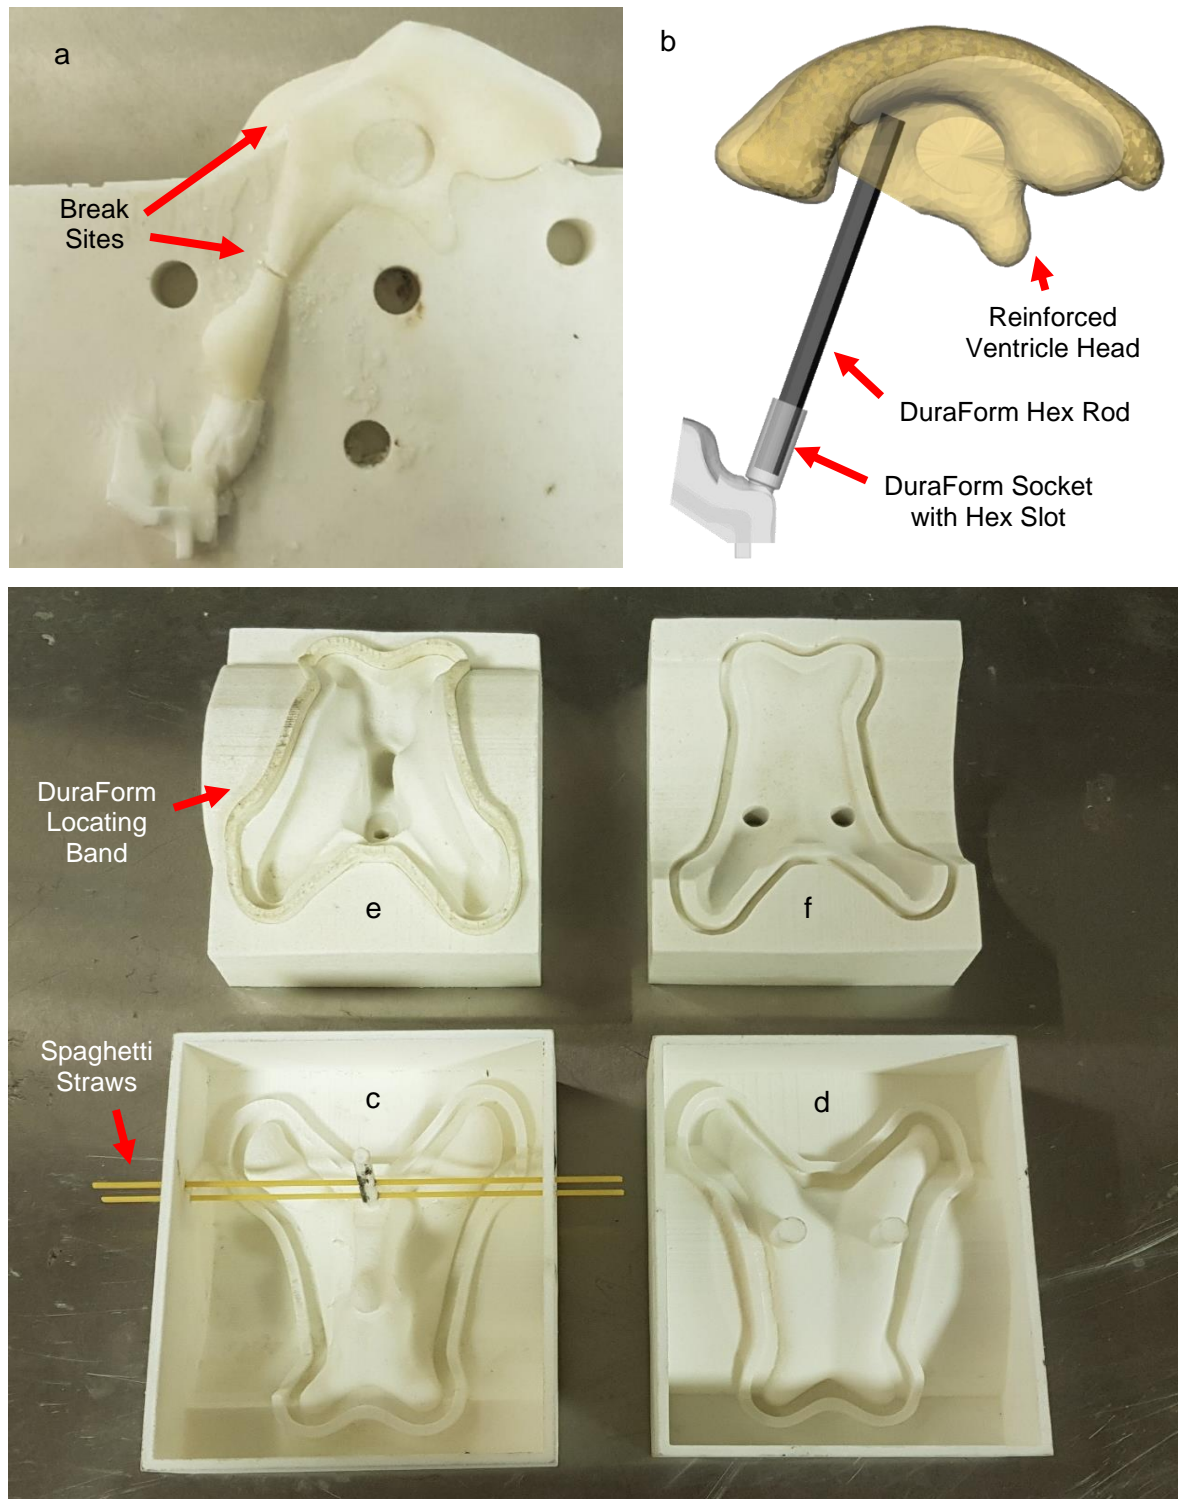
Redesigning the V2 ventricle mould into the V3 ventricle mould. a) breakage sites of V2 CO ventricles on demoulding; b) V3 ventricle design with reinforced ventricle head, DuraForm hex rod and socket; c) bottom positive mould for V3 ventricle mould with moulding spaghetti straws in place; d) top positive mould for V3 ventricle mould; e) bottom section of negative V3 mould with locating band in place; f) top section of negative V3 mould.
